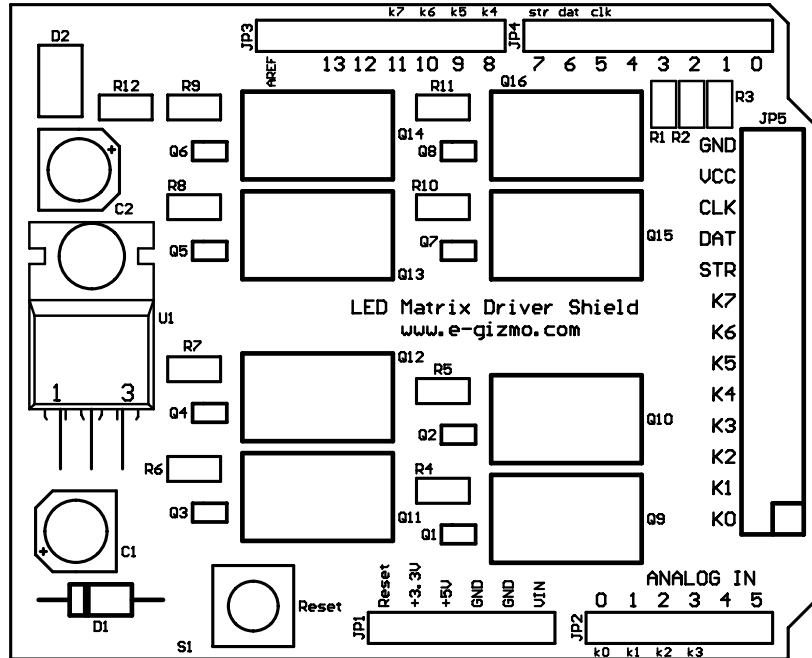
LED Matrix Common Cathode Driver Shield PCB (silkscreen layout)
